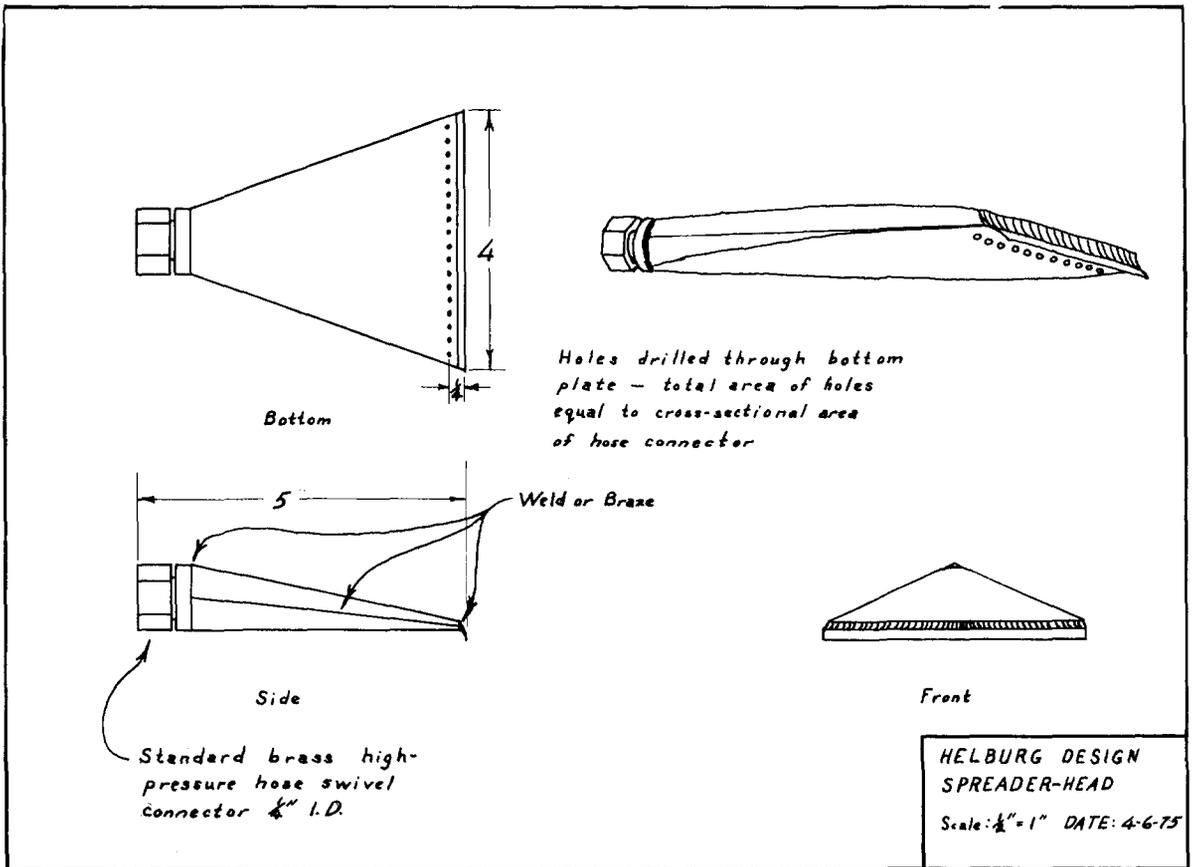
Technique used to spread a thin layer of Stickem on the paper backing.
